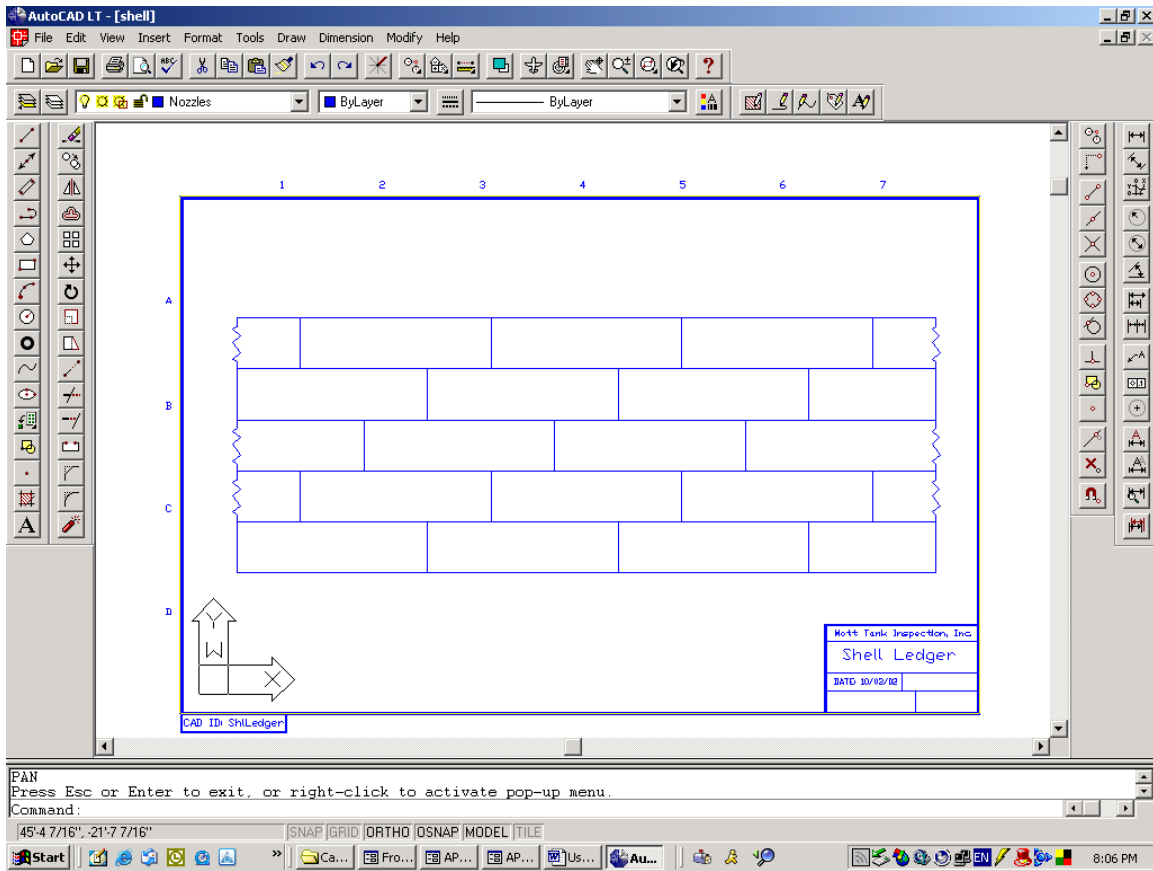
Shell Course Layout with Vert. Weld Seam
